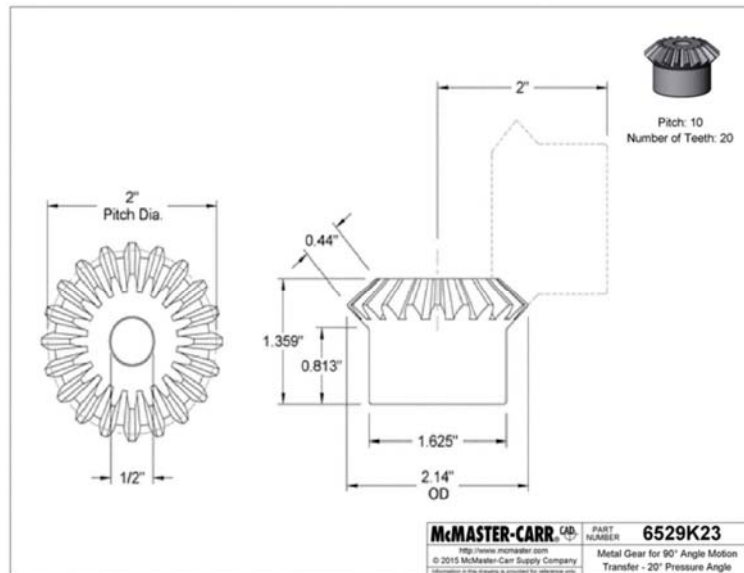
Drawing of 2” (50.8 mm) Pitch Diameter Miter Gear purchased from McMaster-Carr indicating the mate dimensions and overall hub diameters used
